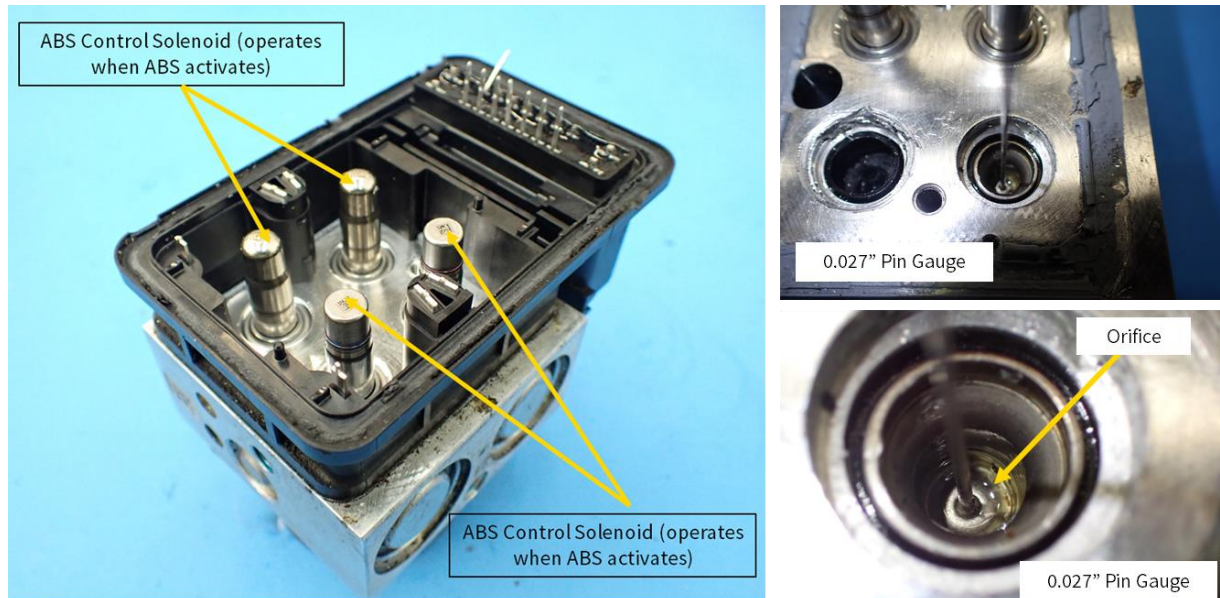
ABS unit with the electronics controller removed and ABS control solenoids exposed (left). With the solenoid valves removed the orifice underneath is visible and measurable with pin gauges.
